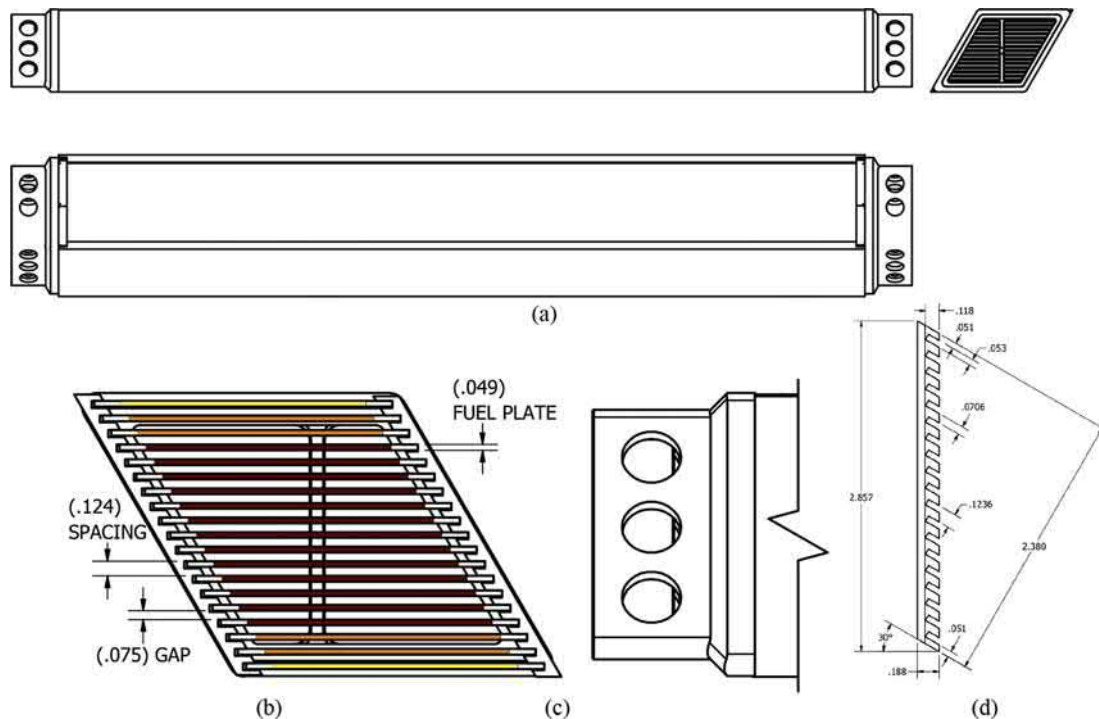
Diagram of an MITR LEU fuel element (A) full element assembly, (B) assembly cross-section, (C) assembly nozzle, and (D) side-plate (dimensions given in inches).
